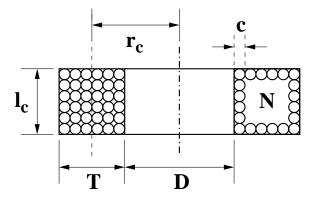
Side cross-sectional view of the pick-up coil used with the MSMA material.
